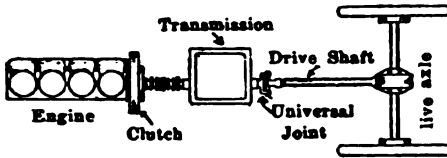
Shaft drive type of transmission. Transmission mounted on frame directly back of clutch and is of the gear type. This type used to great extent on pleasure cars. Transmission of the gear type.
